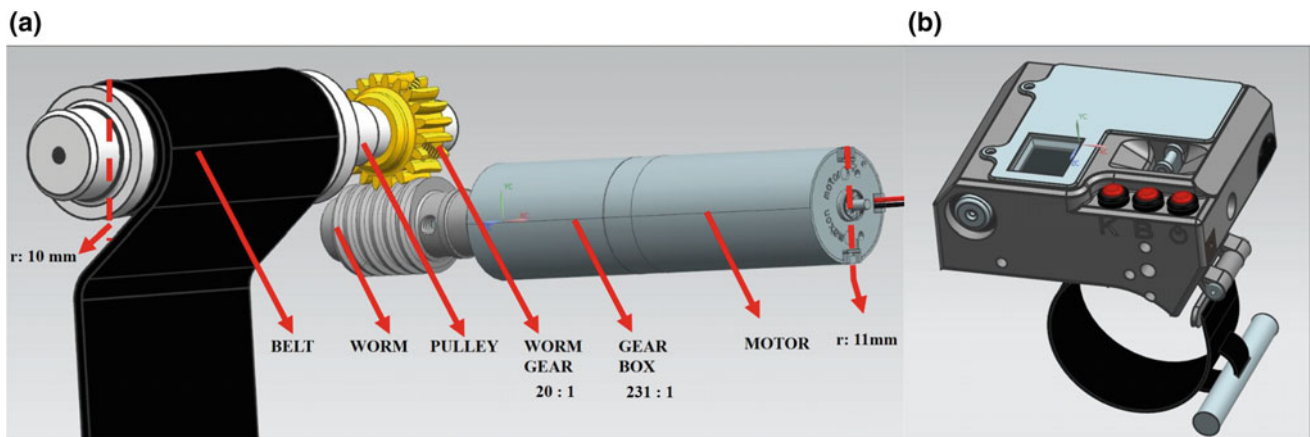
a MST's worm gear mechanism 3D design, b MST's 3D design
